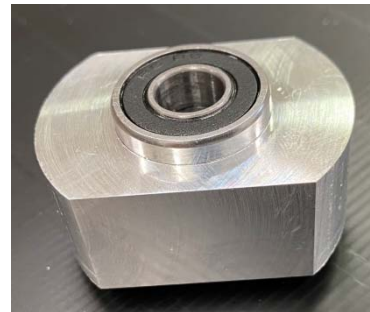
Housing with dual bearing installed- milled to a precision of about 0.0005"
